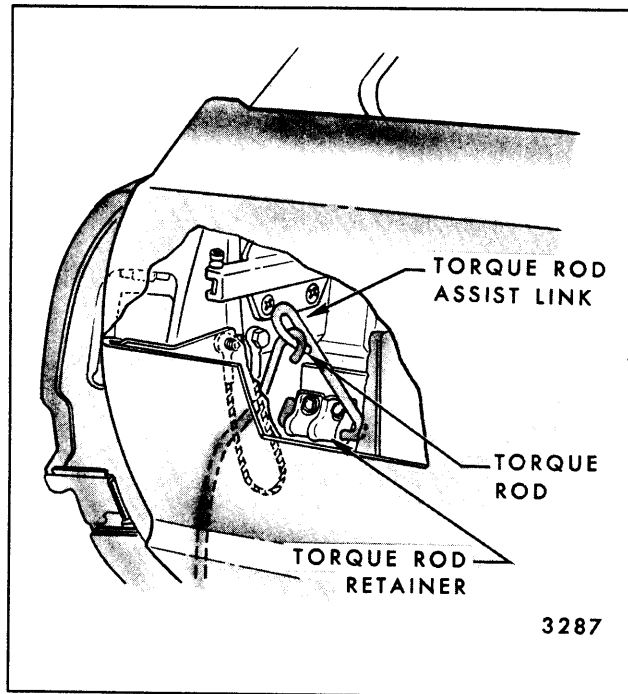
Dual Gate - Torque Rod to Body Attachment
